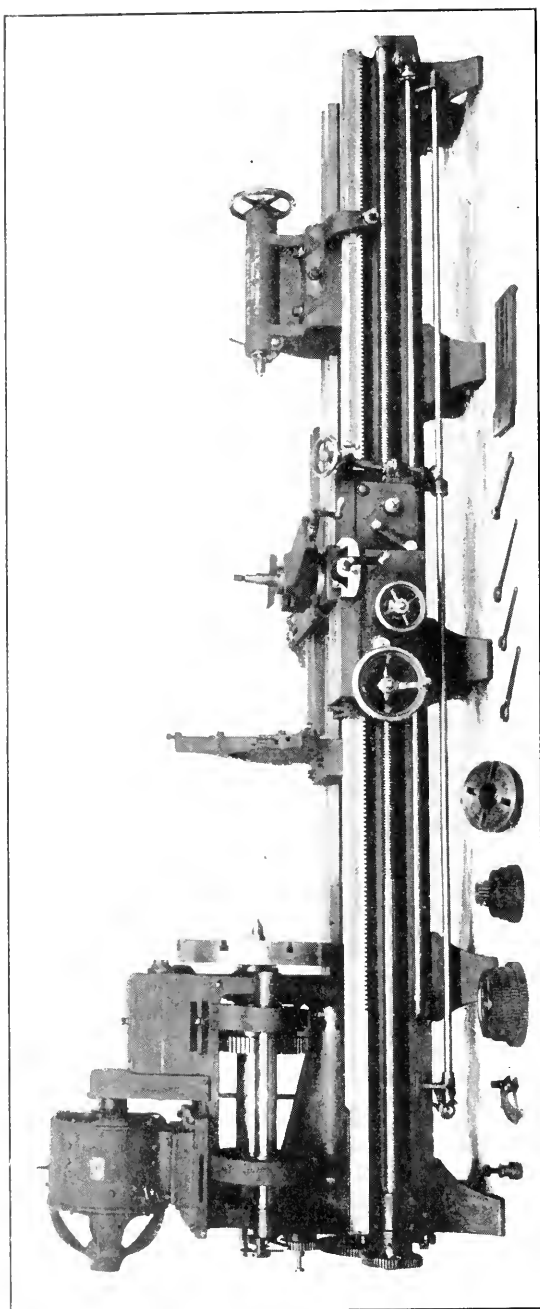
APPLICATION OF ARMATURE-SHIFTING MOTOR TO A LATHE
